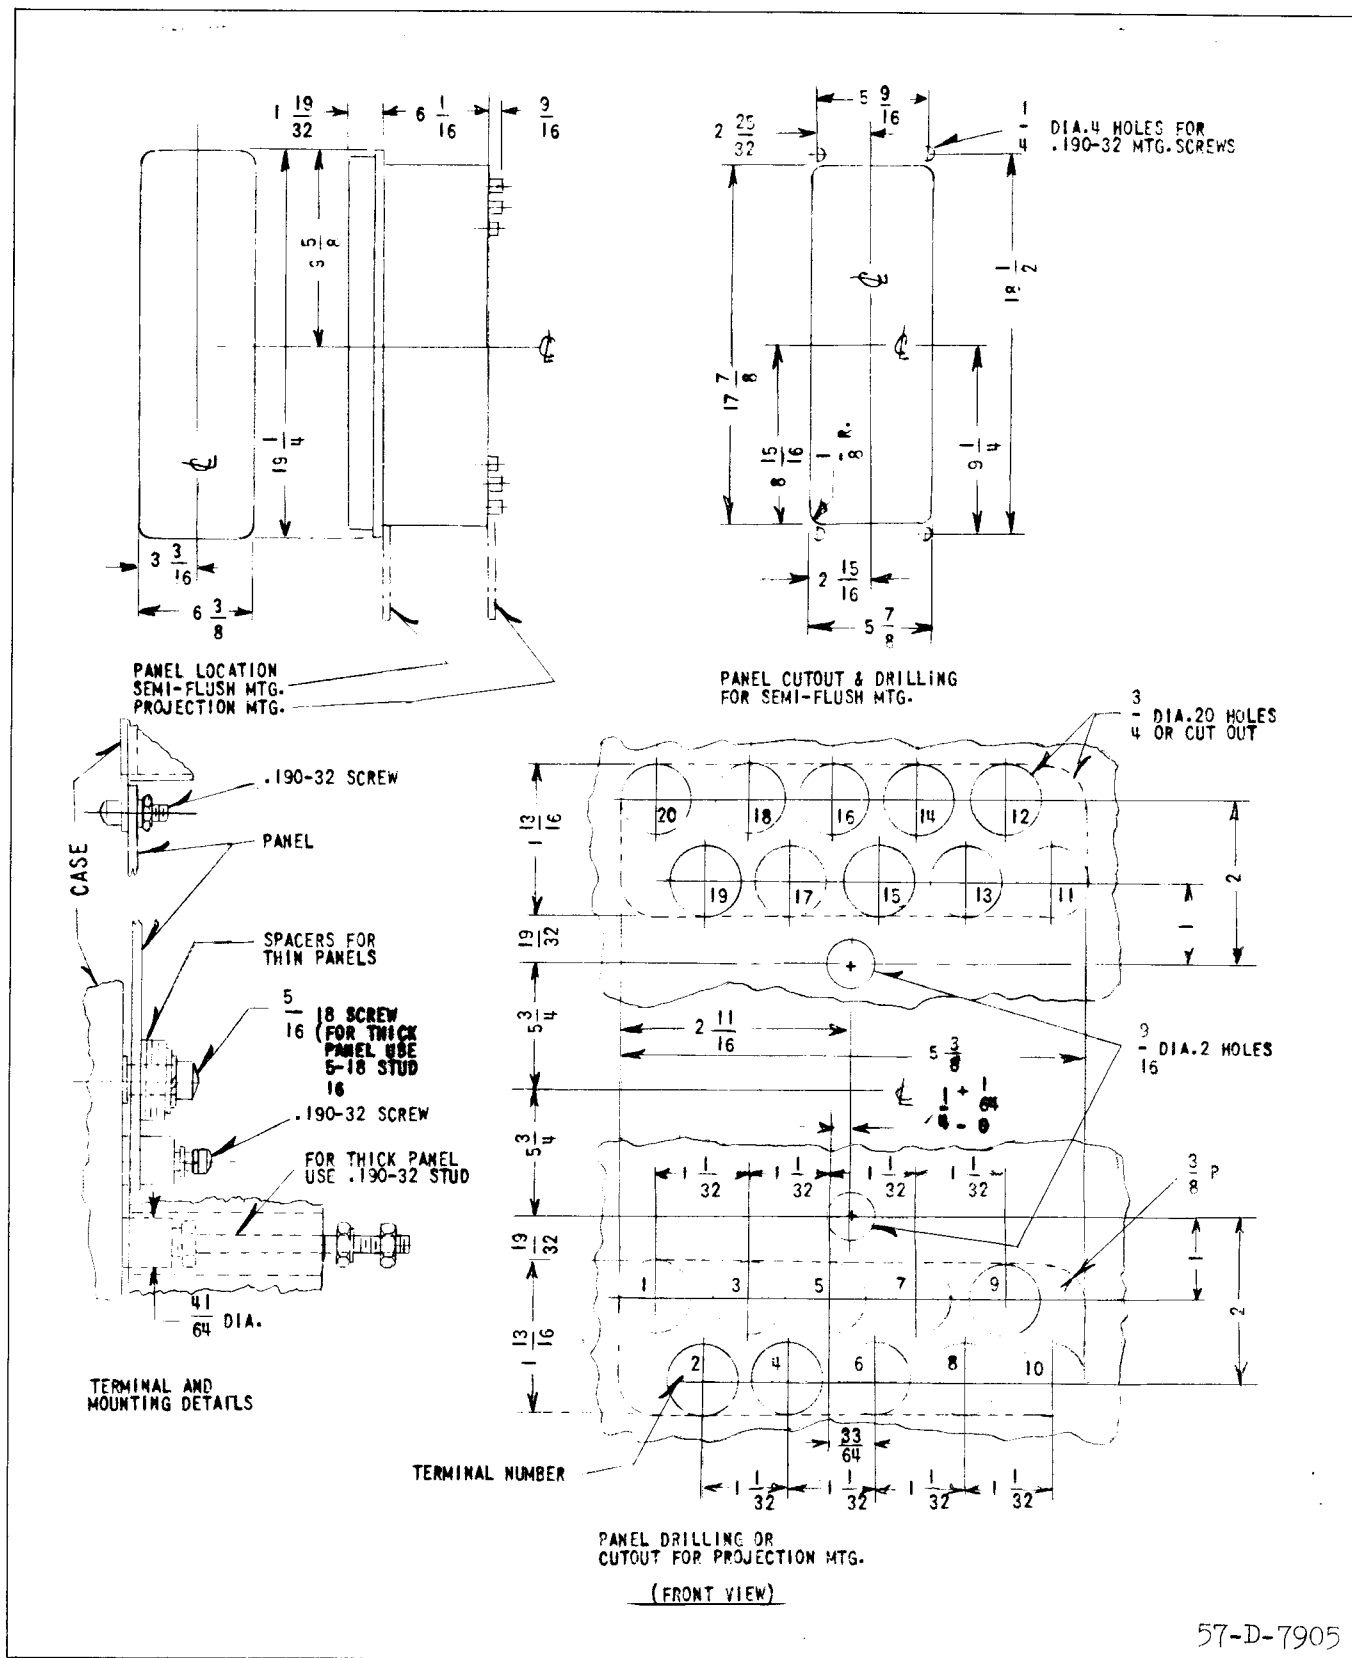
Outline and Drilling Plan for the Type FT42 Case
